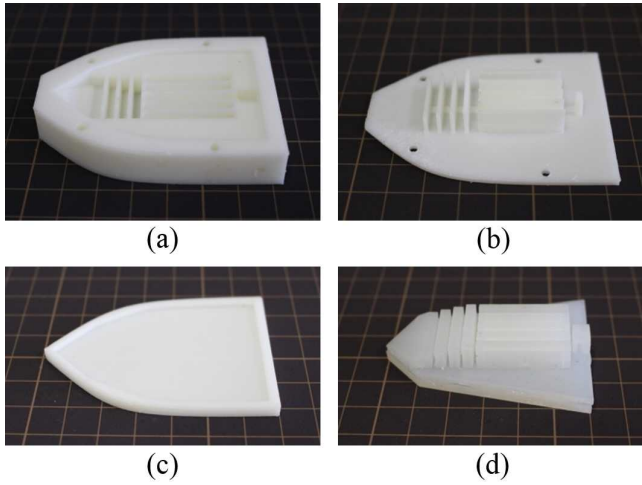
3D printed molds for casting process: (a) the chamber female mold, (b) the chamber male mold, (c) the cover mold, and (d) an example of the fabricated soft finger.
